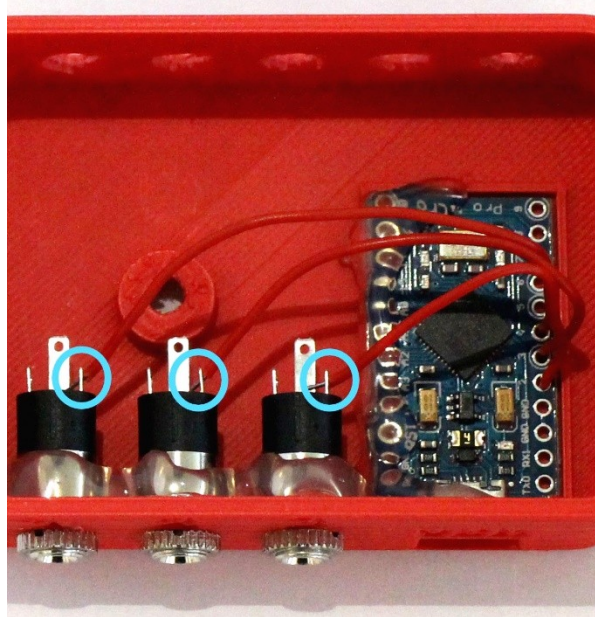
The wires of pins 2-4 of the microcontroller are each connected to pin 2 of the jack sockets
